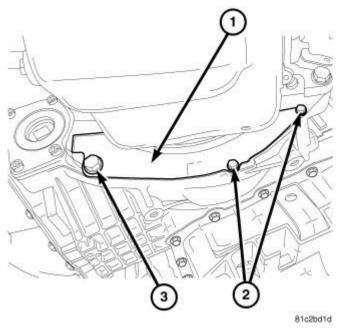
Inspection Cover Courtesy of CHRYSLER LLC
